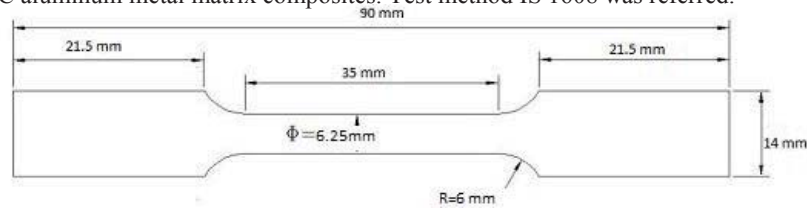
Dimensions of tensile test specimens for 3% SiC - aluminum metal matrix composite
